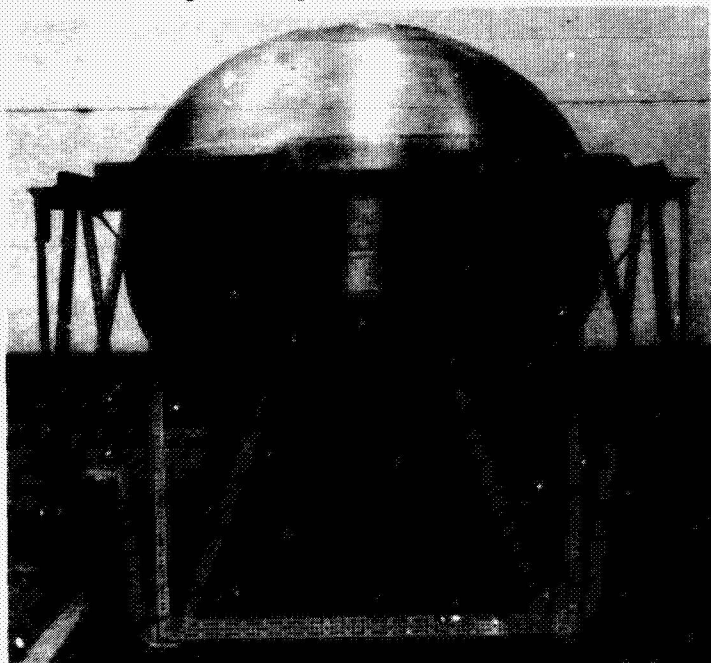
Convair Aerospace 2.21/1.89 m (87.6/74.5 in) Dia Oblate Spheroid Tank in Support Fixture
